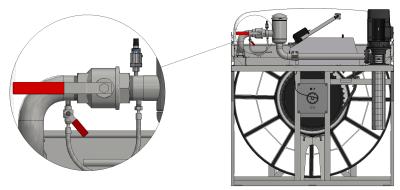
Main valve and bypass valve for checking the nozzles.
